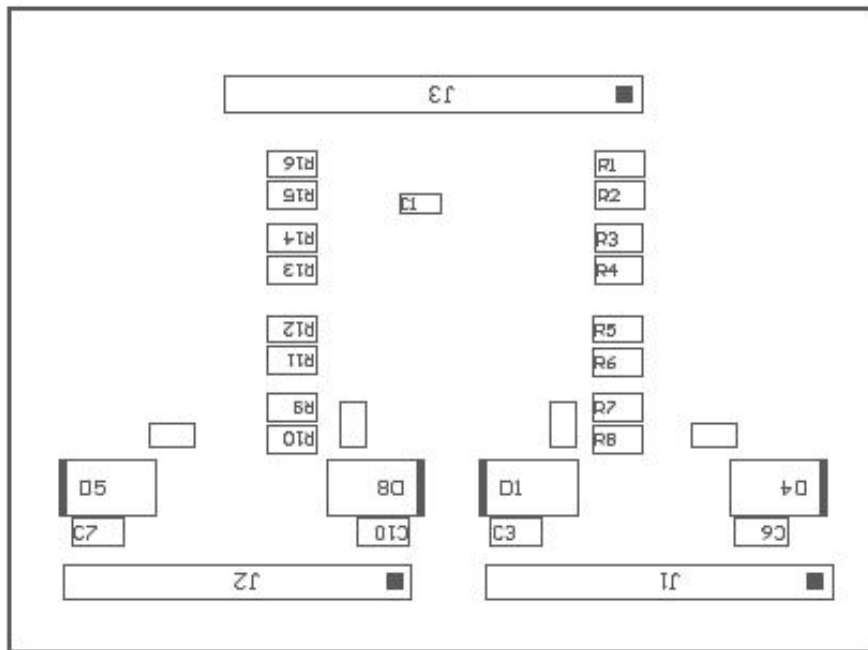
TPS23880EVM-008 (Daughterboard) Bottom Side Assembly
